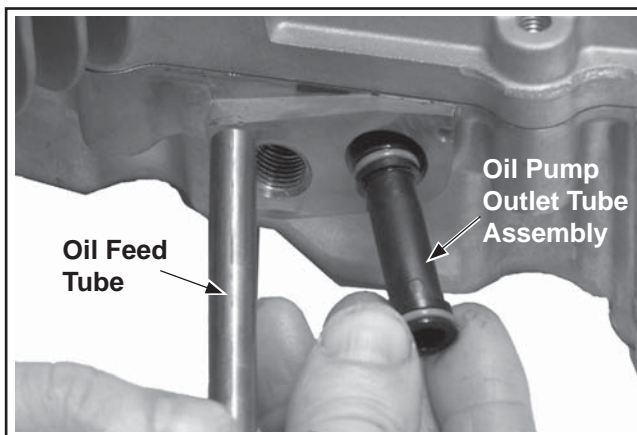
Removing Oil Pump Outlet Tube Assembly and Oil Feed Tube.
